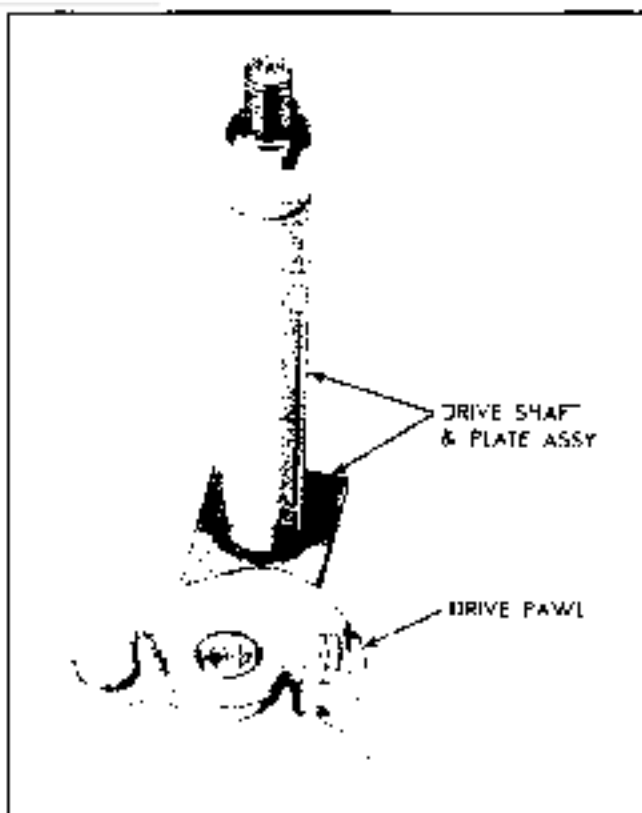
Assembly of Drive Pawl to Drive Shaft—Pontiac
